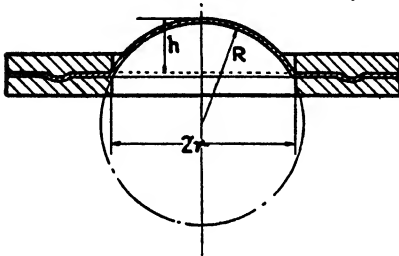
FORM OF CLAMPING RING FOR HYDRAULIC CUPPING TESTS
